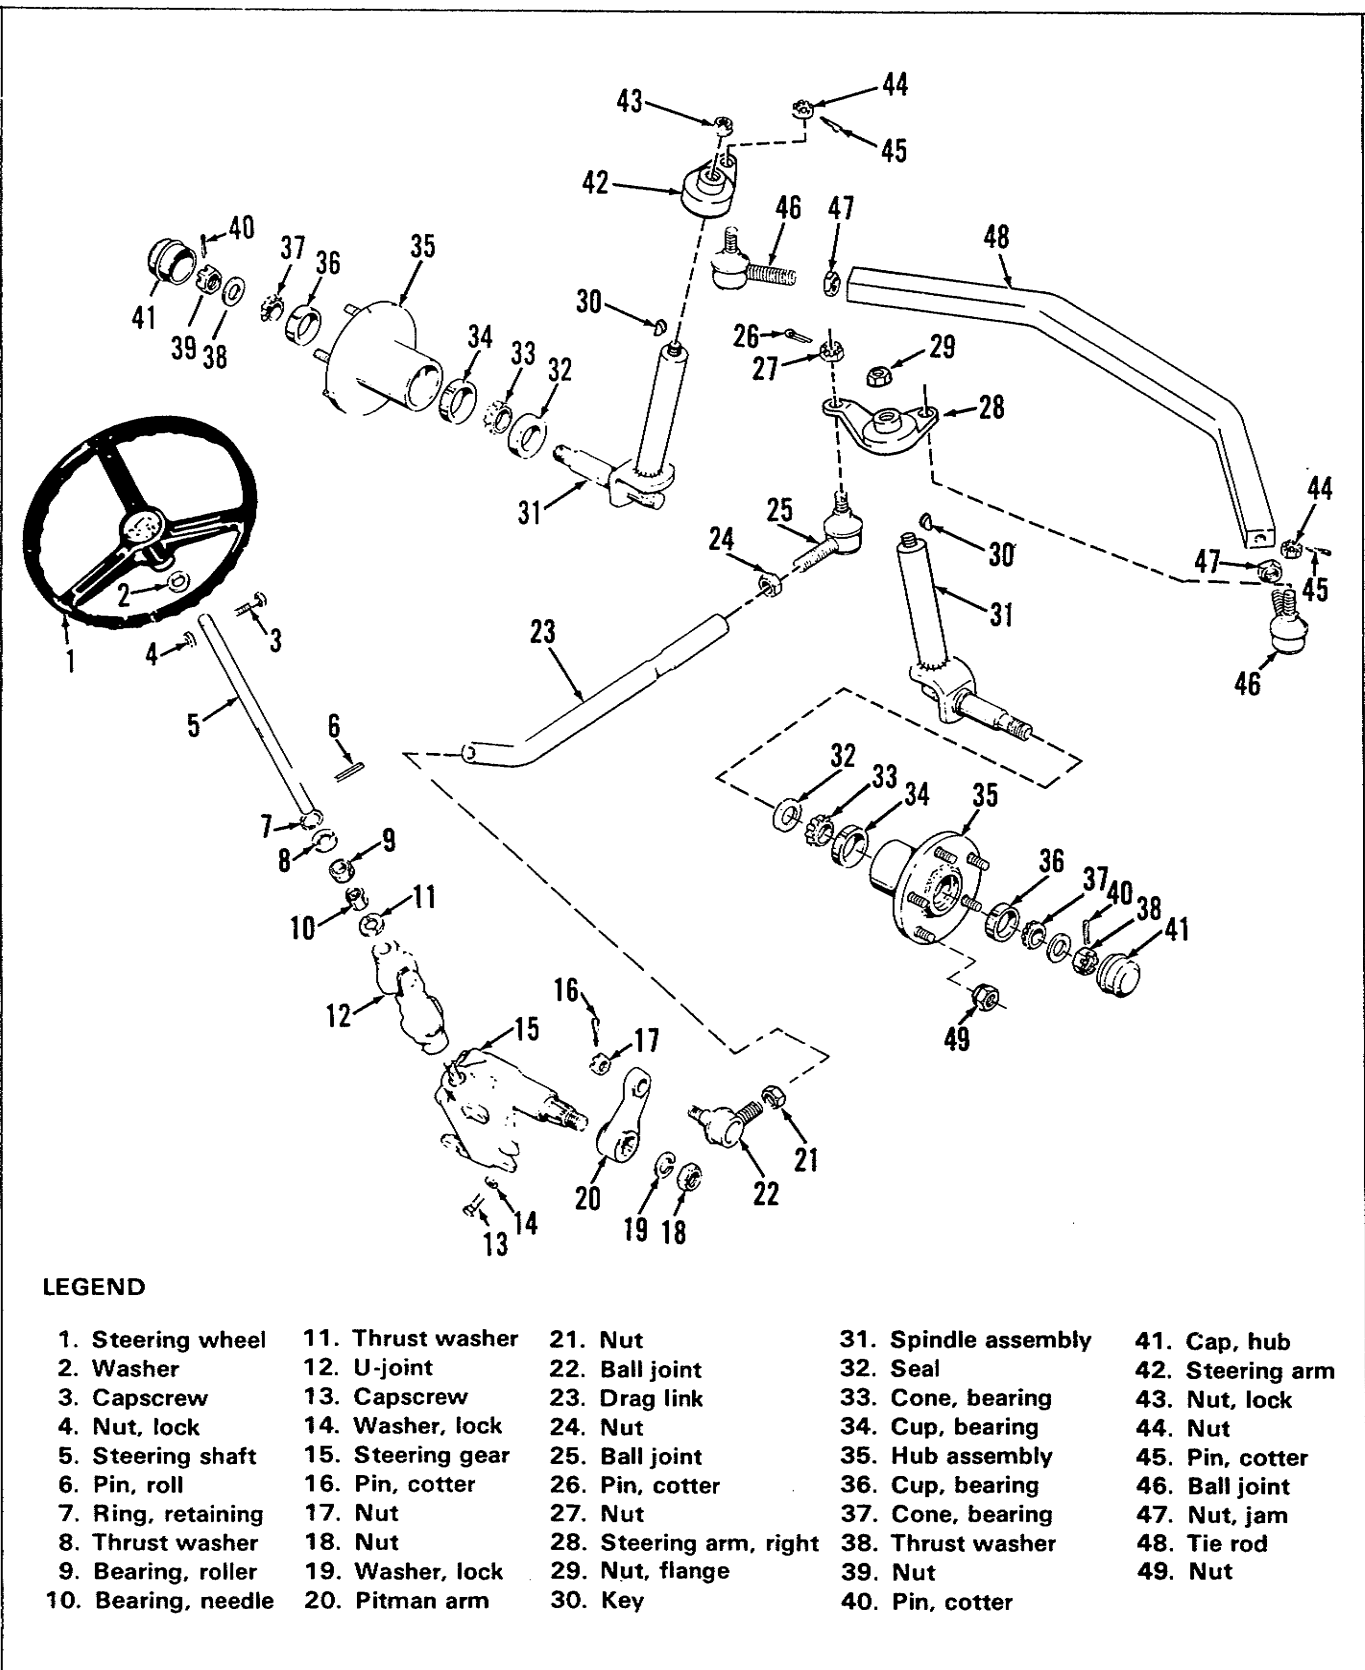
Steering Shaft, Gear, Hub, and Spindle Assemblies
